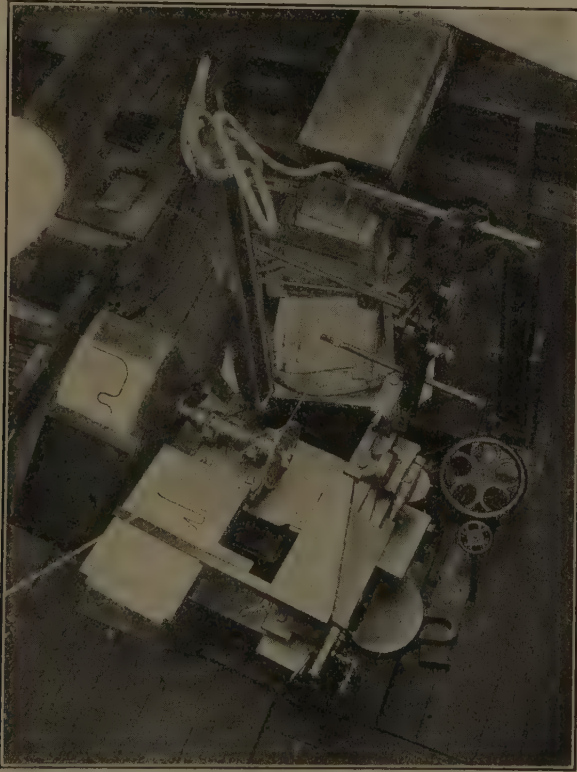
TOP VIEW OF COMBINED TRAVERSING, PLOTTING AND ENLARGING MACHINE IMPROVISED FROM A SCRAPPED GRINDER
